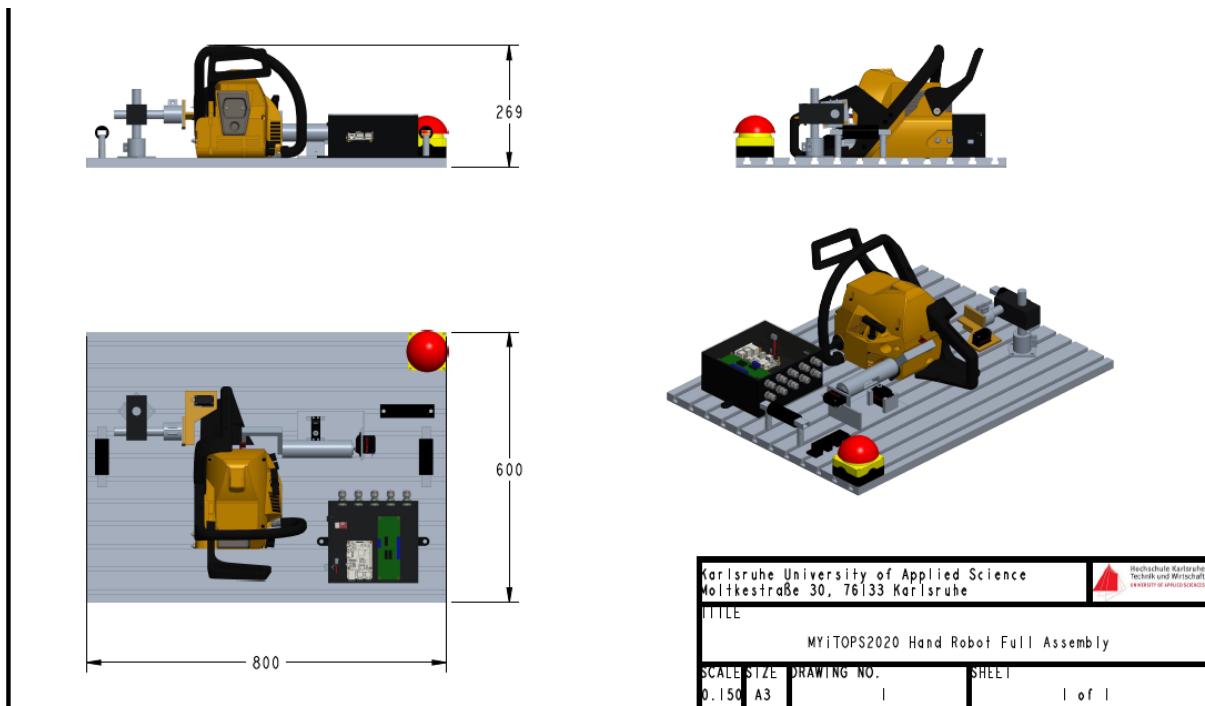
Full Assembly of the MYiTOPS2020 Robot Hand
